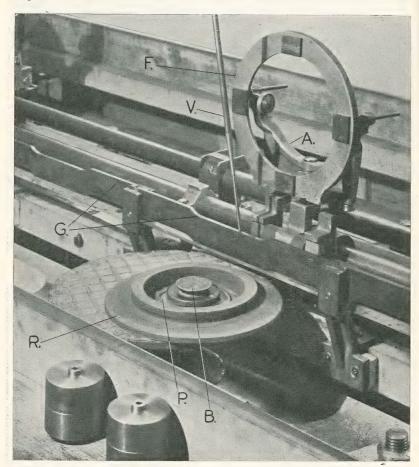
Detail of Single Surface Machine for high accuracy. (Hilger.)
